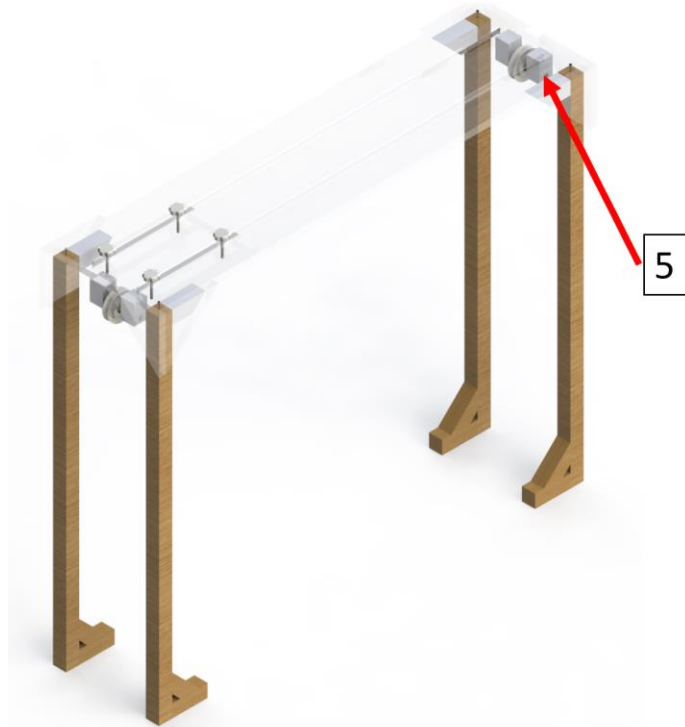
CAD Geometry of Fixed Pulley Component of Top Assembly
